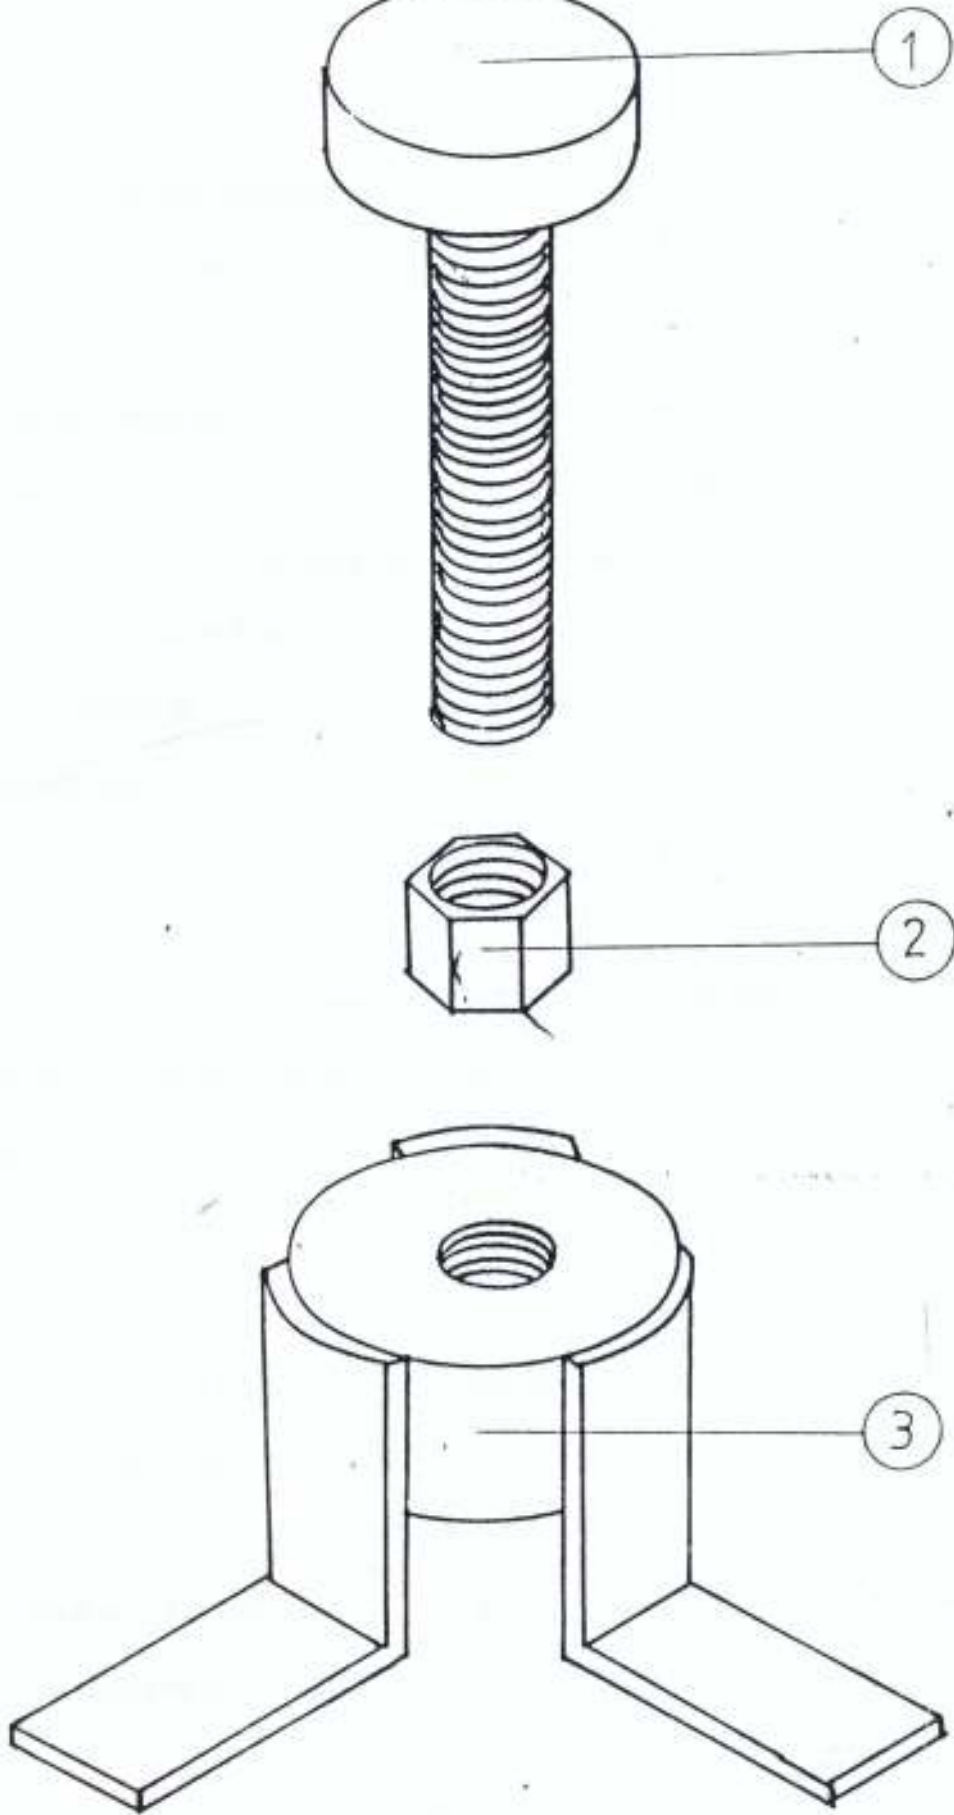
EXPLODED VIEW OF MECHANICAL DEVICE
